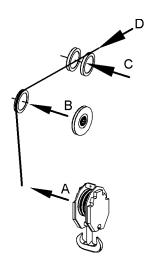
Rope reeving system for auxiliary jib on luffing jib head section 1916, 1713, 1309, 1008 (load position 2)
